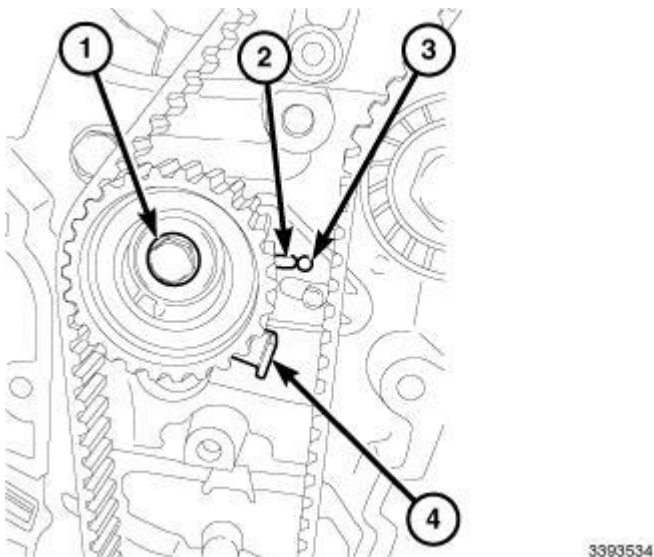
Bolt, Tensioner Arrow, Mark & Tensioner Tab
